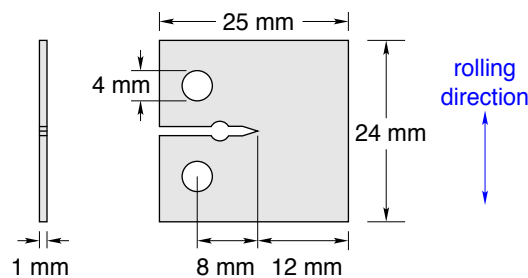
Compact tension samples conforming to ASTM E561 were cut with wire EDM from the cold-rolled sheets with the rolling direction perpendicular to the crack notch.
